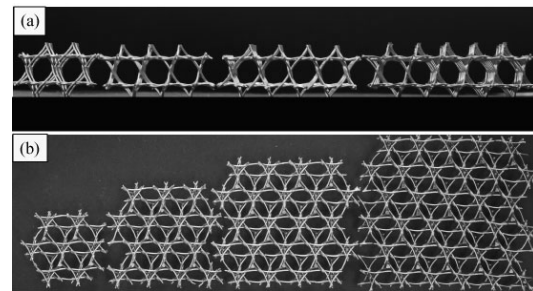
Different size of WBK specimens: (a) Front view and (b) Top view.
